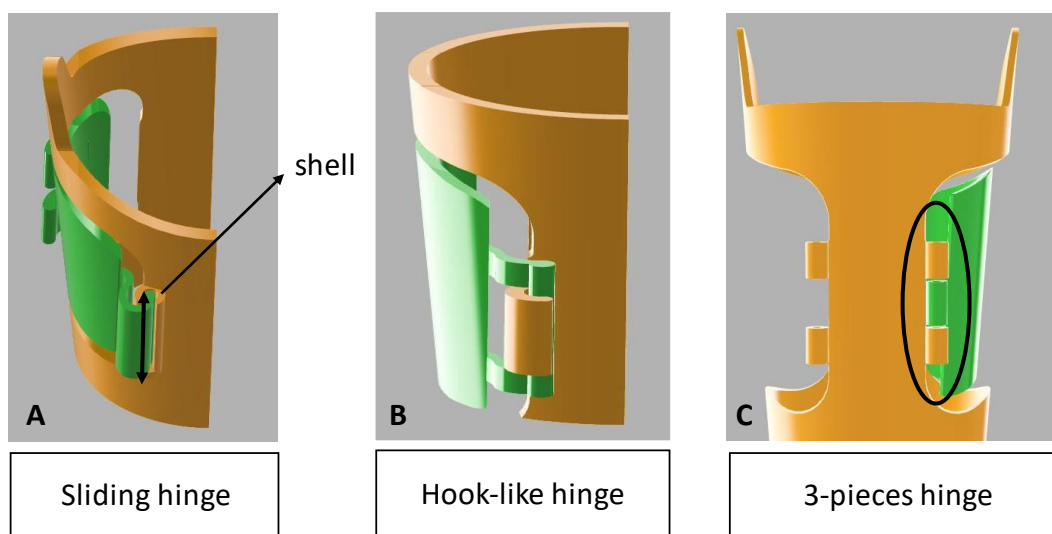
The models of the hinge joints when adapted to the socket design. (A) The Sliding hinge connects the adjustable wing (shown in green) to the hinge shell through sliding till a closed end of the shell. (B) The adjustable wings are hooked to the main shell. (C) The 3-pieces hinge requires a metal rod to connect the adjustable wing joint to the main shell joints.
